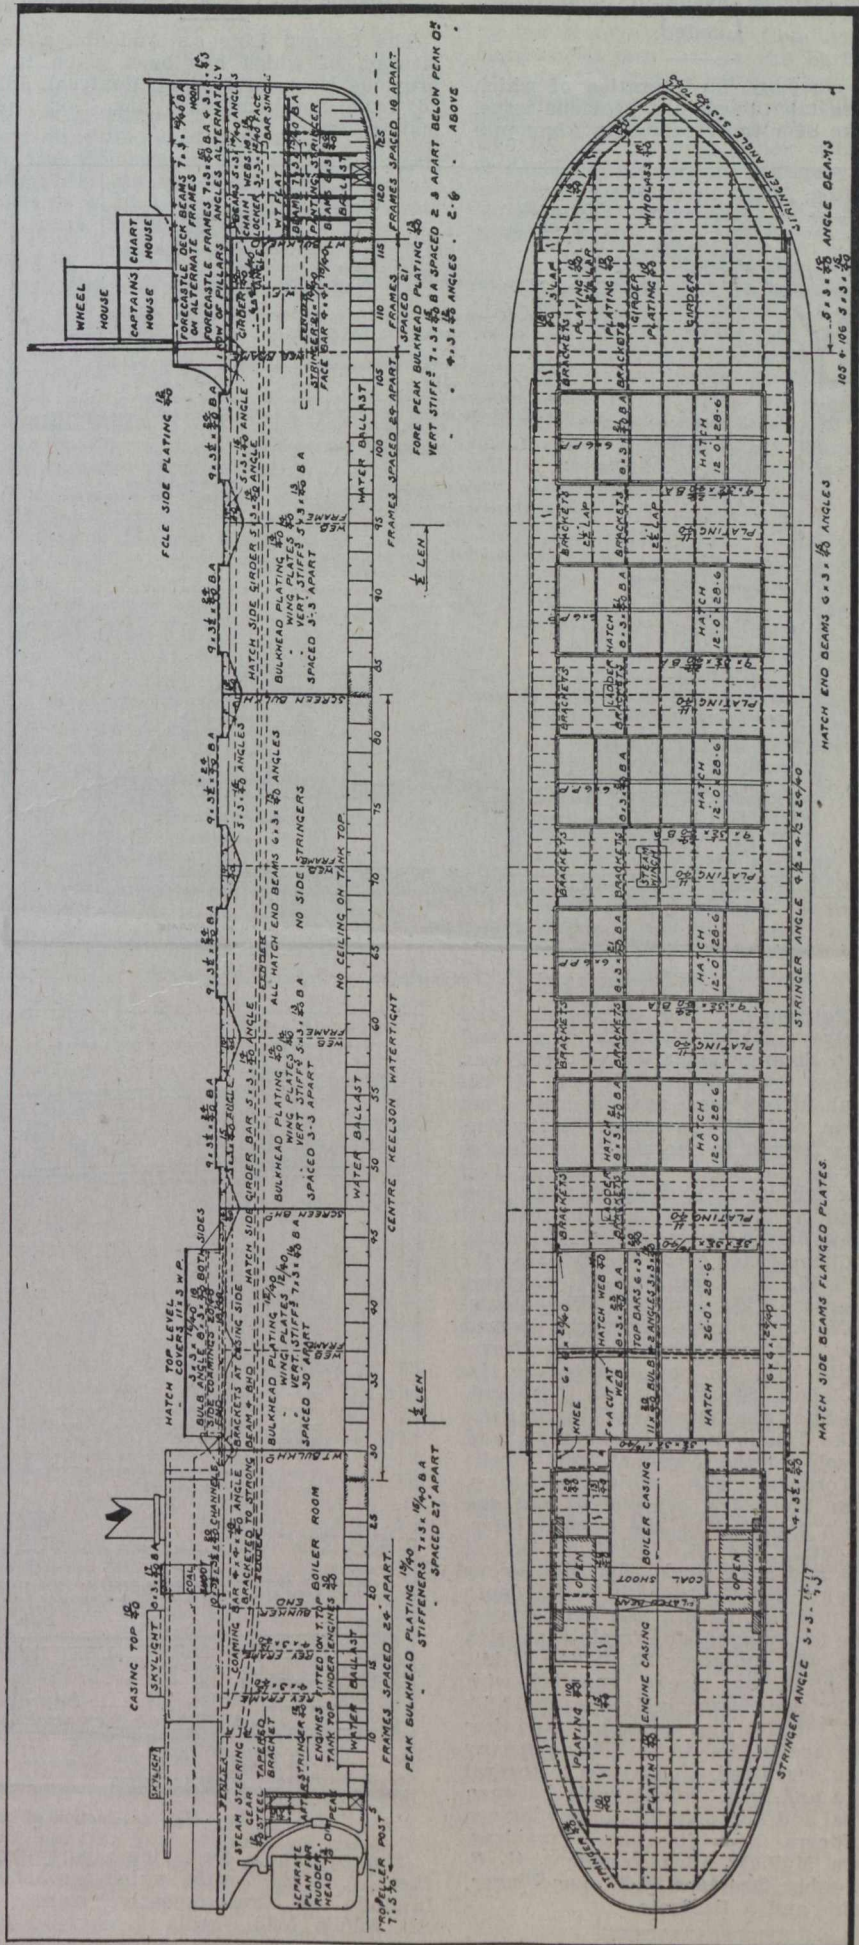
Profile and Deck Plan of the Glenmavis.
